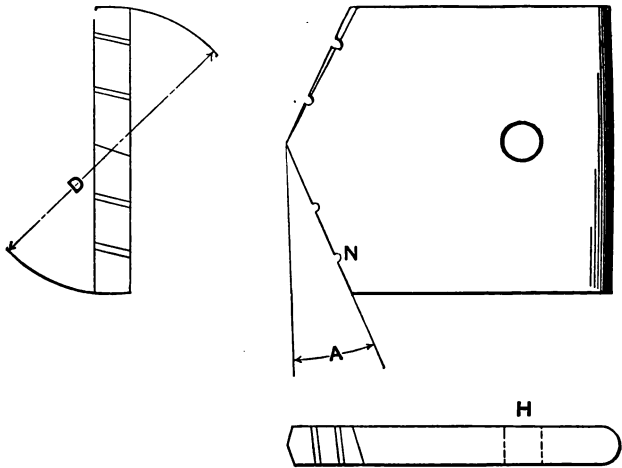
High Speed Steel Cutter used in the Drill in Fig. 268
